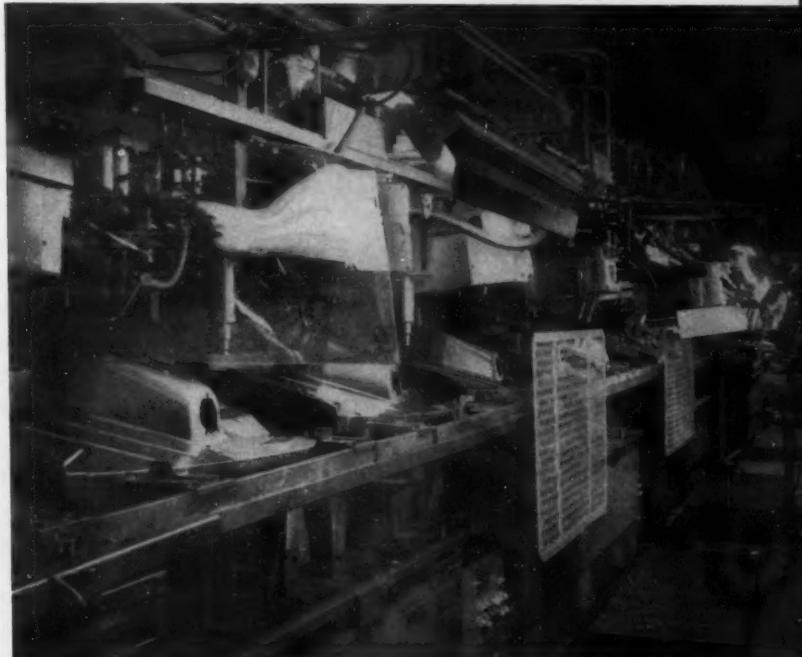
Close-up view of one of the Ford standard, C-frame welding presses, which have their own air and hydraulic systems.
